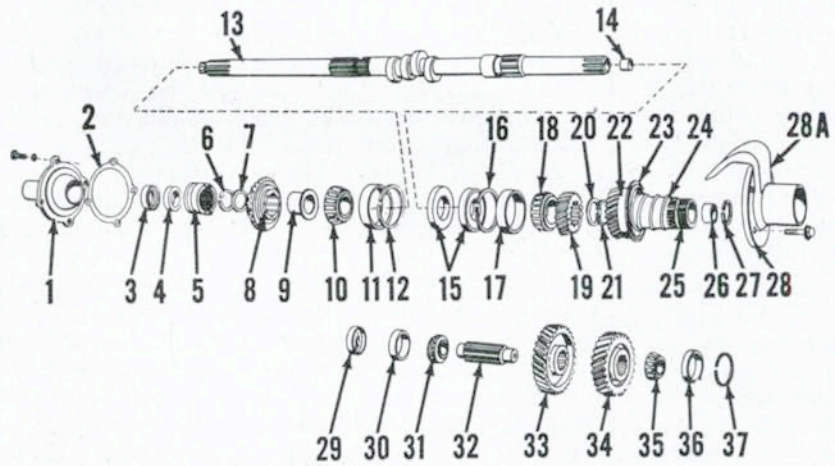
Exploded view of D-14 and D-15 clutch shaft and associated parts. Lip seals (3 & 4) face toward rear.
